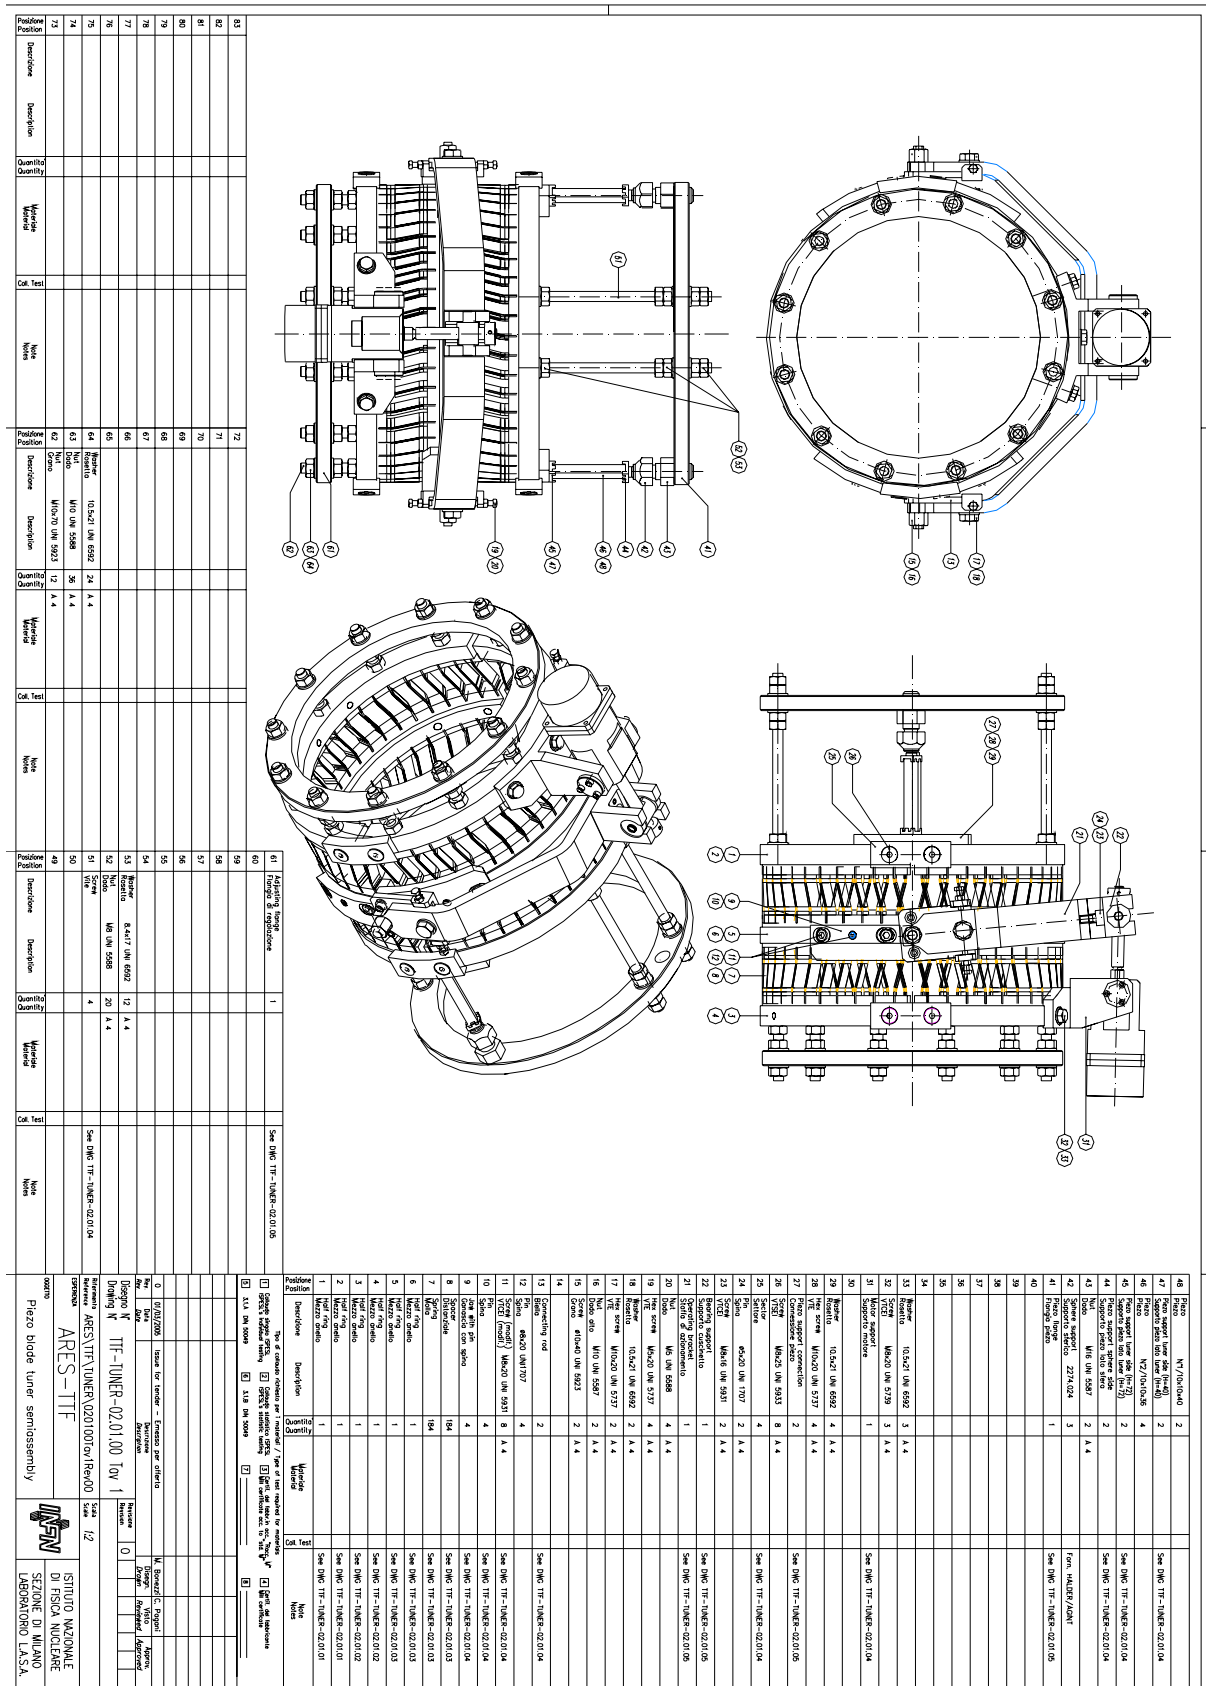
Piezo blade tuner technical drawings. The single tuning part and detail drawing numbers are here reported for reference.
